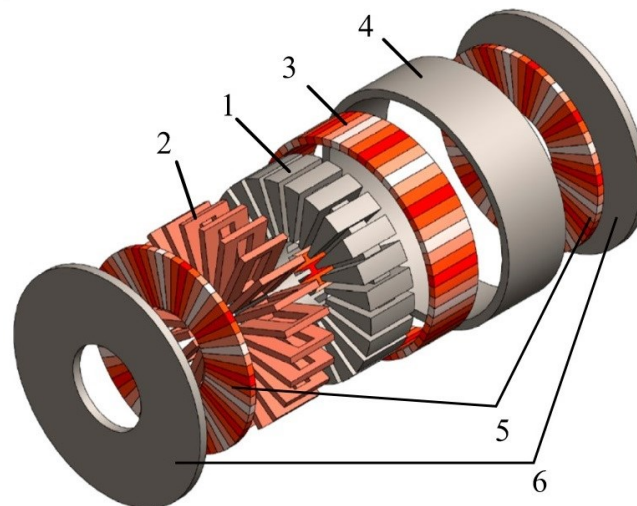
Topology of the axial-radial flux permanent magnet machine. 1—Stator core, 2—Windings, 3—Radial PMs, 4—Radial rotor back iron, 5—Axial PMs, 6—Axial rotor back iron [62]
